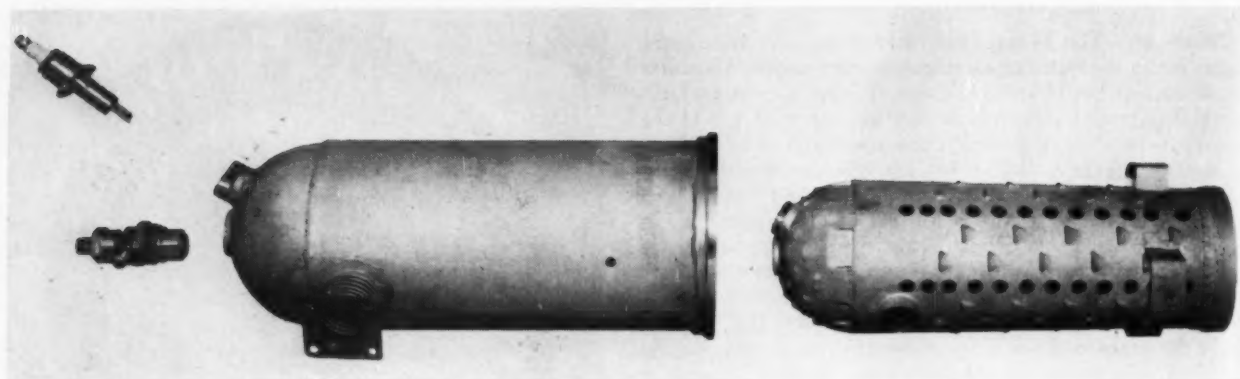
COMBUSTION CHAMBER, LINER, FUEL NOZZLE, AND SPARK PLUG
